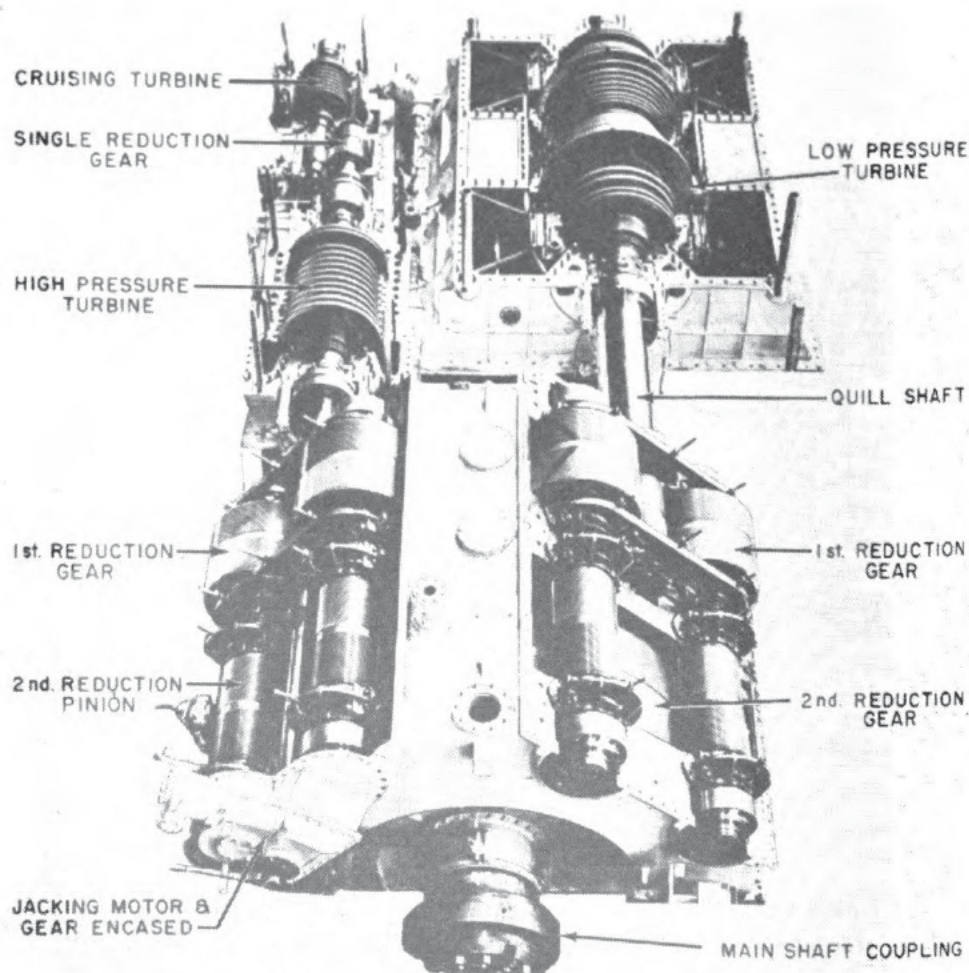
Turbines and locked train double reduction gearing of a combatant ship.
